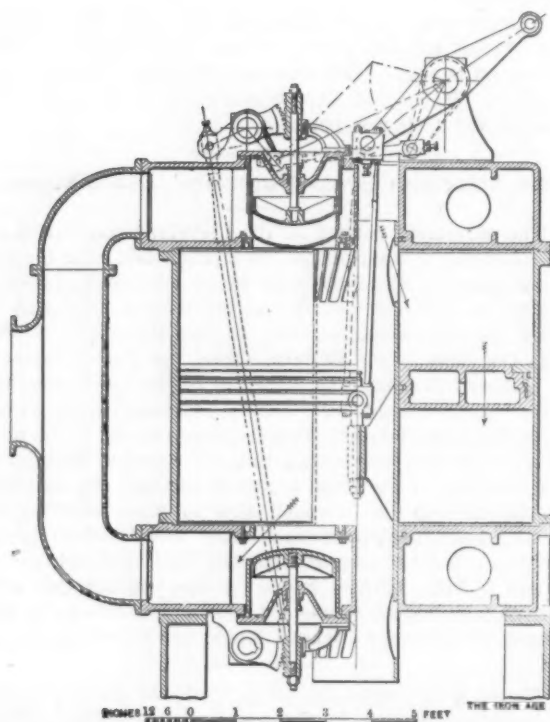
Blowing Cylinder Fitted with Kennedy-Reynolds Valve Gear.
